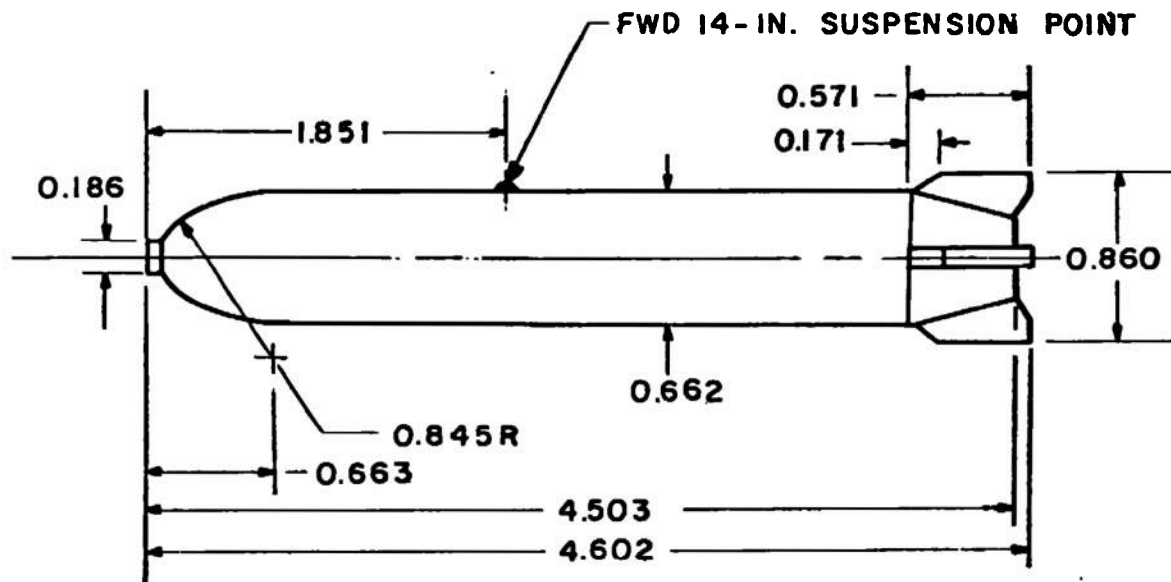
Details and Dimensions of the CBU-52B/B Dispenser Model
